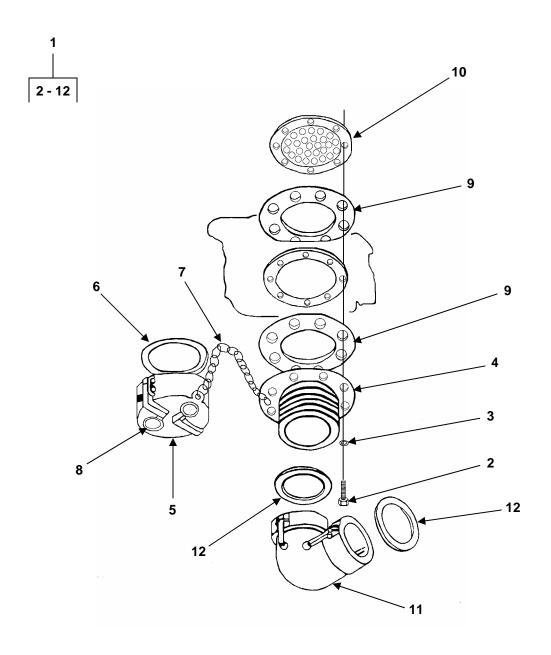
Berm Liner Drain Fitting Assembly (Model GTA-210KF)
